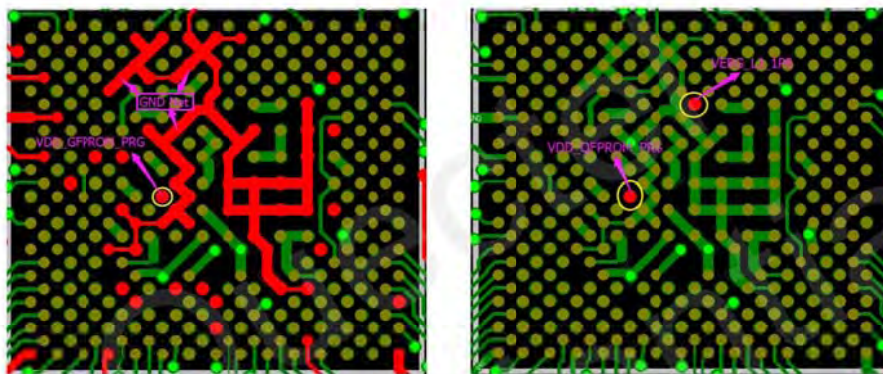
PCB Designs of BG96 R1.1 and R1.2
